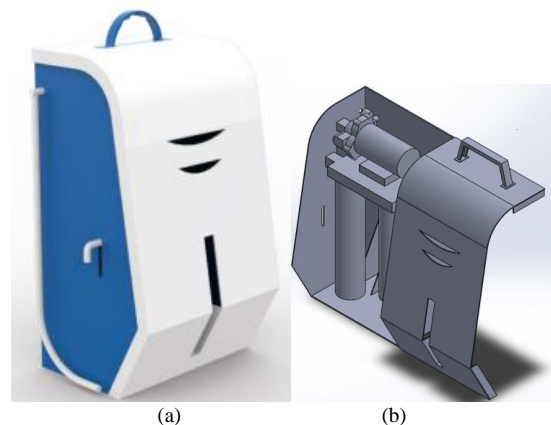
System chassis design: (a) product form (b) internal placement by 3D computer modeling.
